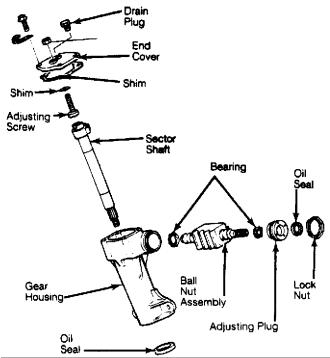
Exploded View of Steering Gear Assembly (Pickups)
